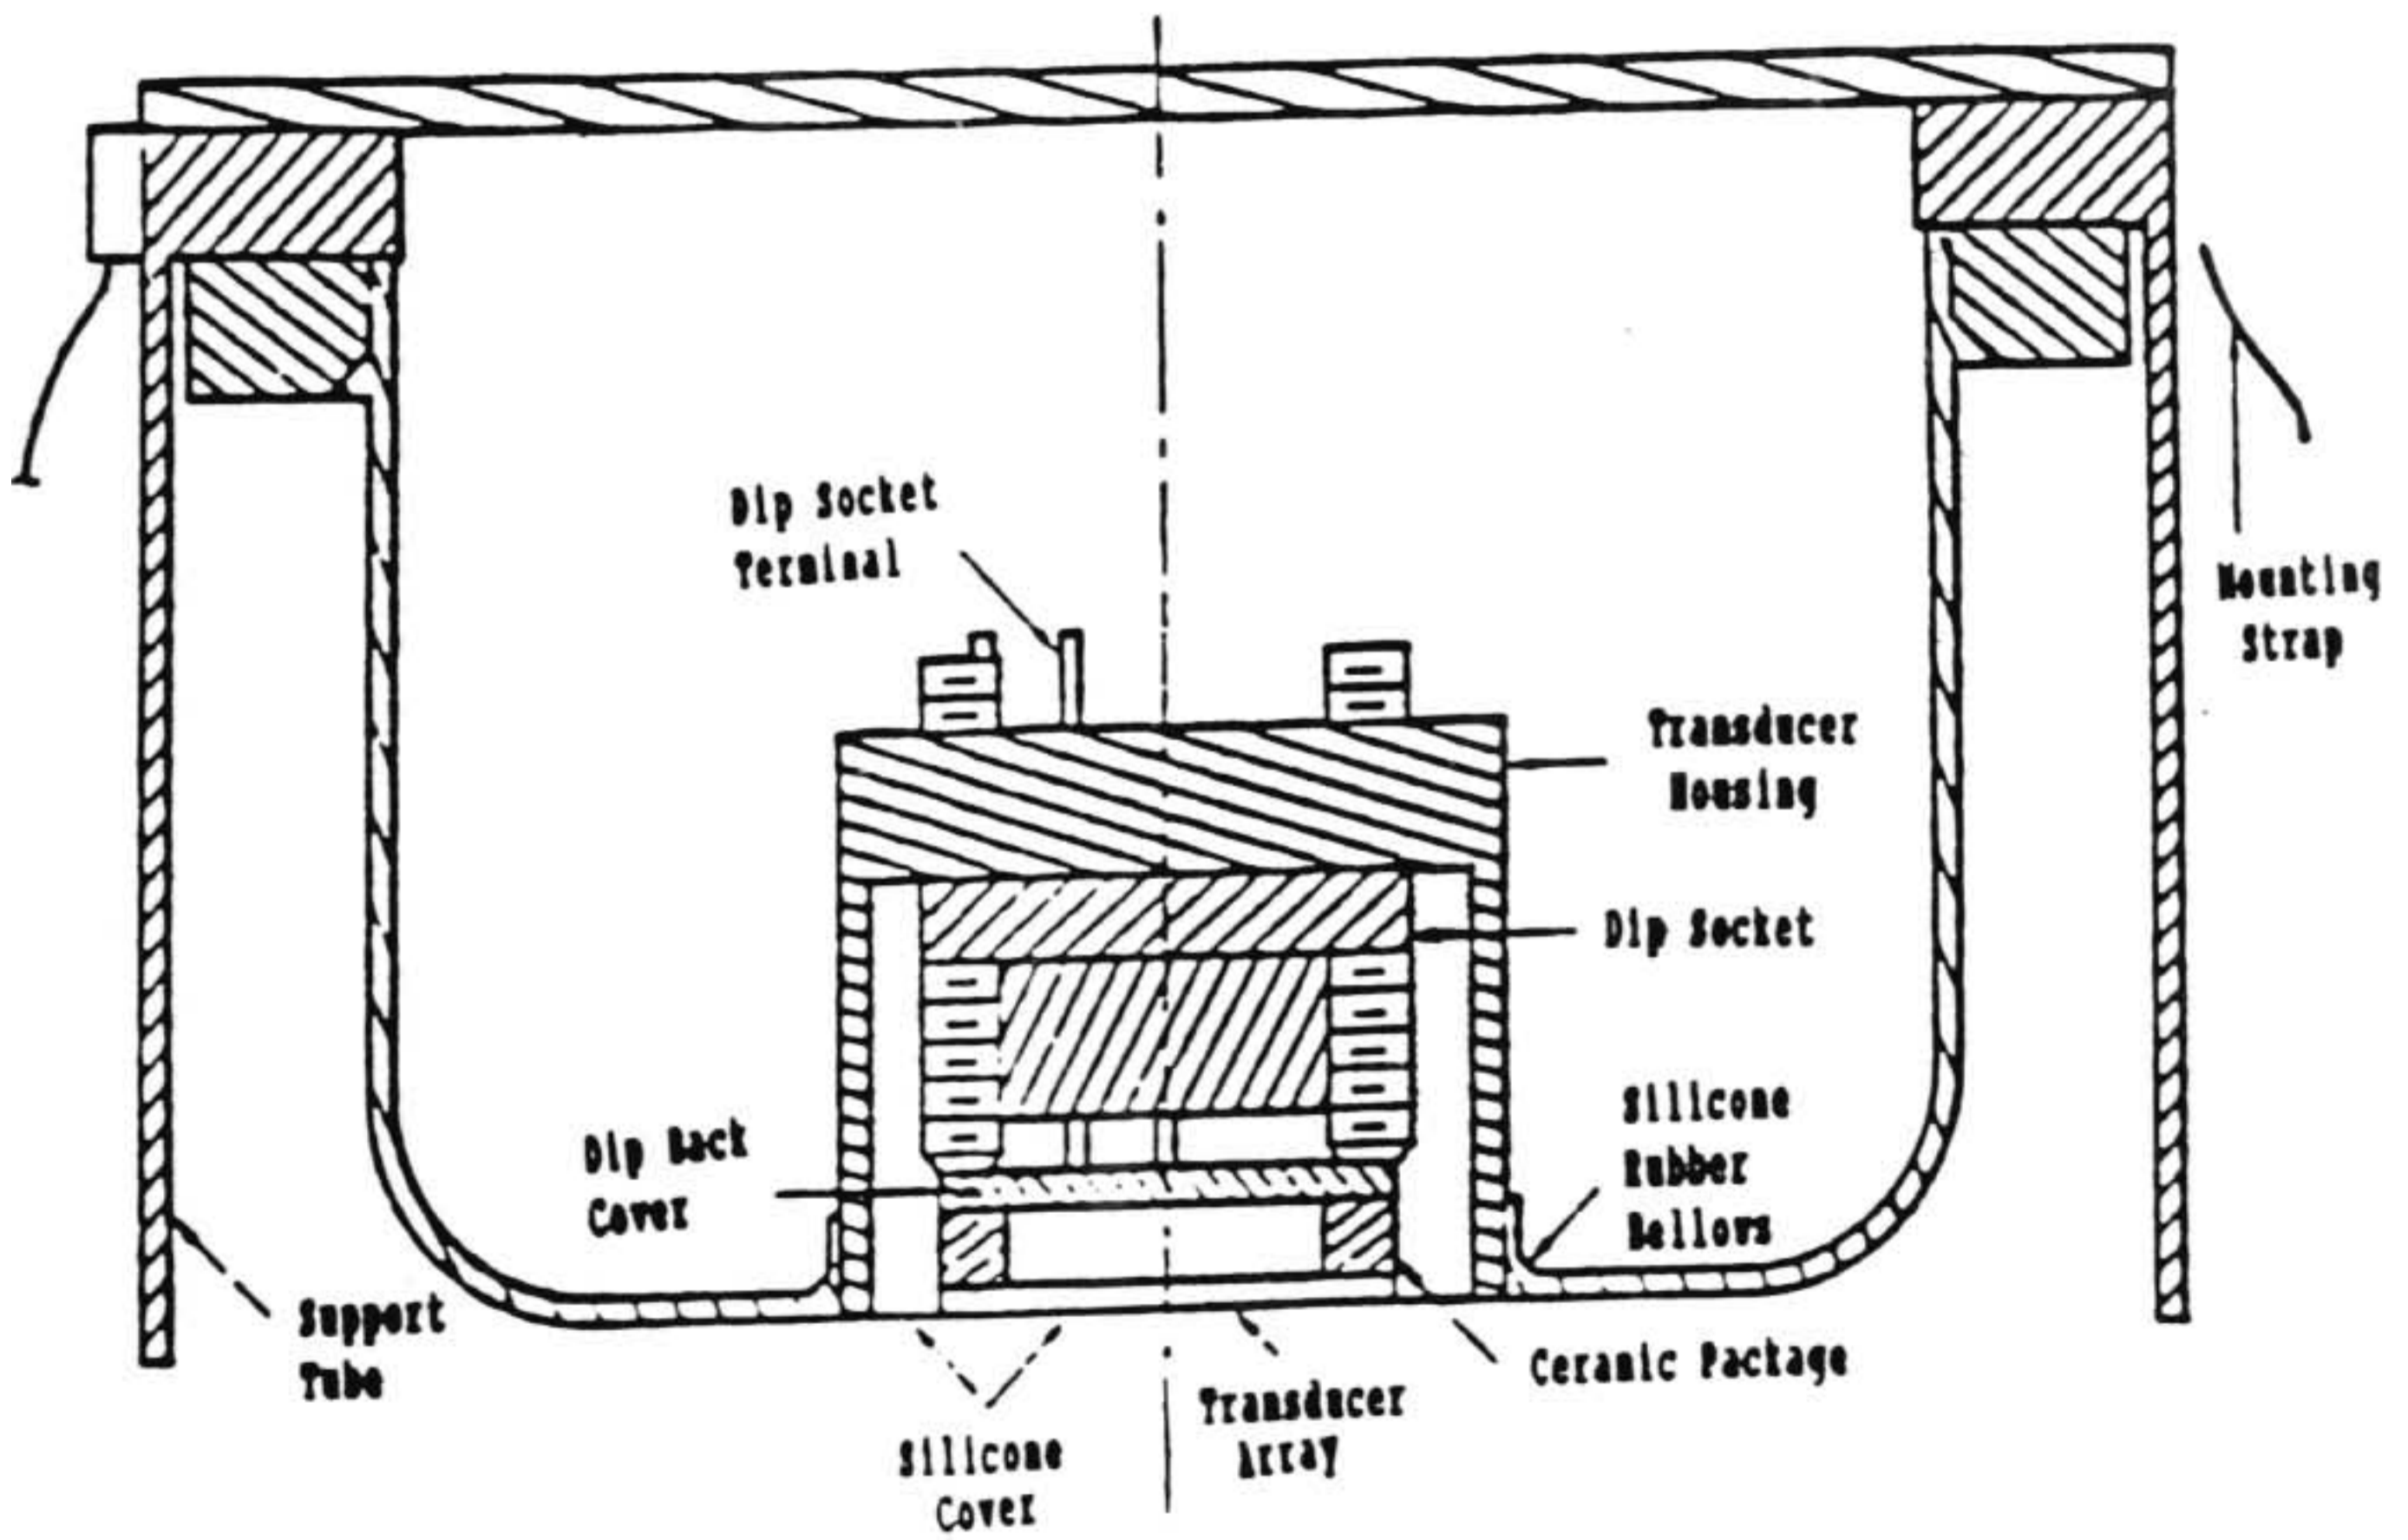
TRANSDUCER ARRAY AND SUPPORT STRUCTURE, CROSS SECTION
